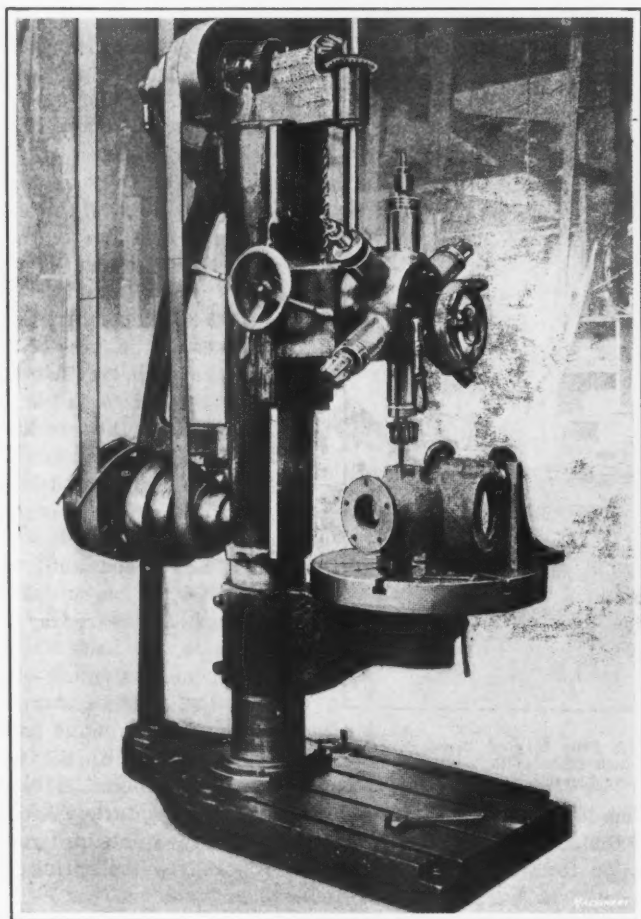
Turret Type of Drilling Machine built by A. E. Quint in which Turret revolves in Vertical Plane
